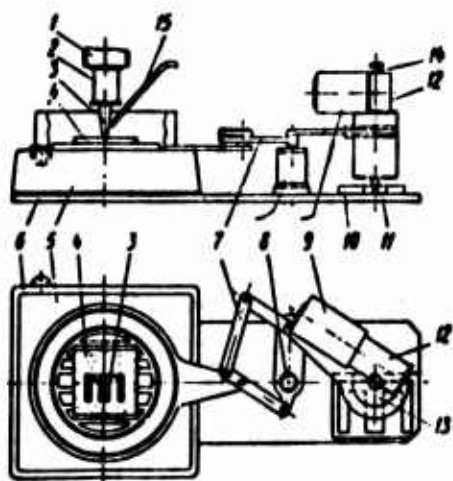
Scribing device for ultrasonic treatment of parts by contour: 1 - machine carriage; 2 - converter; 3 - tool; 4 - processed part; 5 - table with bath; 6 - base; 7 - pantograph levers; 8 - revolving support; 9 - motor; 10 - scribe; 11 - magnetic roller; 12 - reductor; 13 - magnetic clutch; 14 - handle for raising magnetic roller from scribing groove; 15 - pipe and hose for supply of suspension to zone of treatment.
